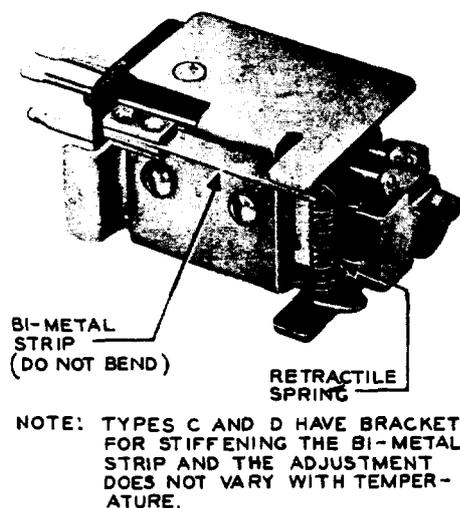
253-Type Relay (Bottom View A and B Types)
